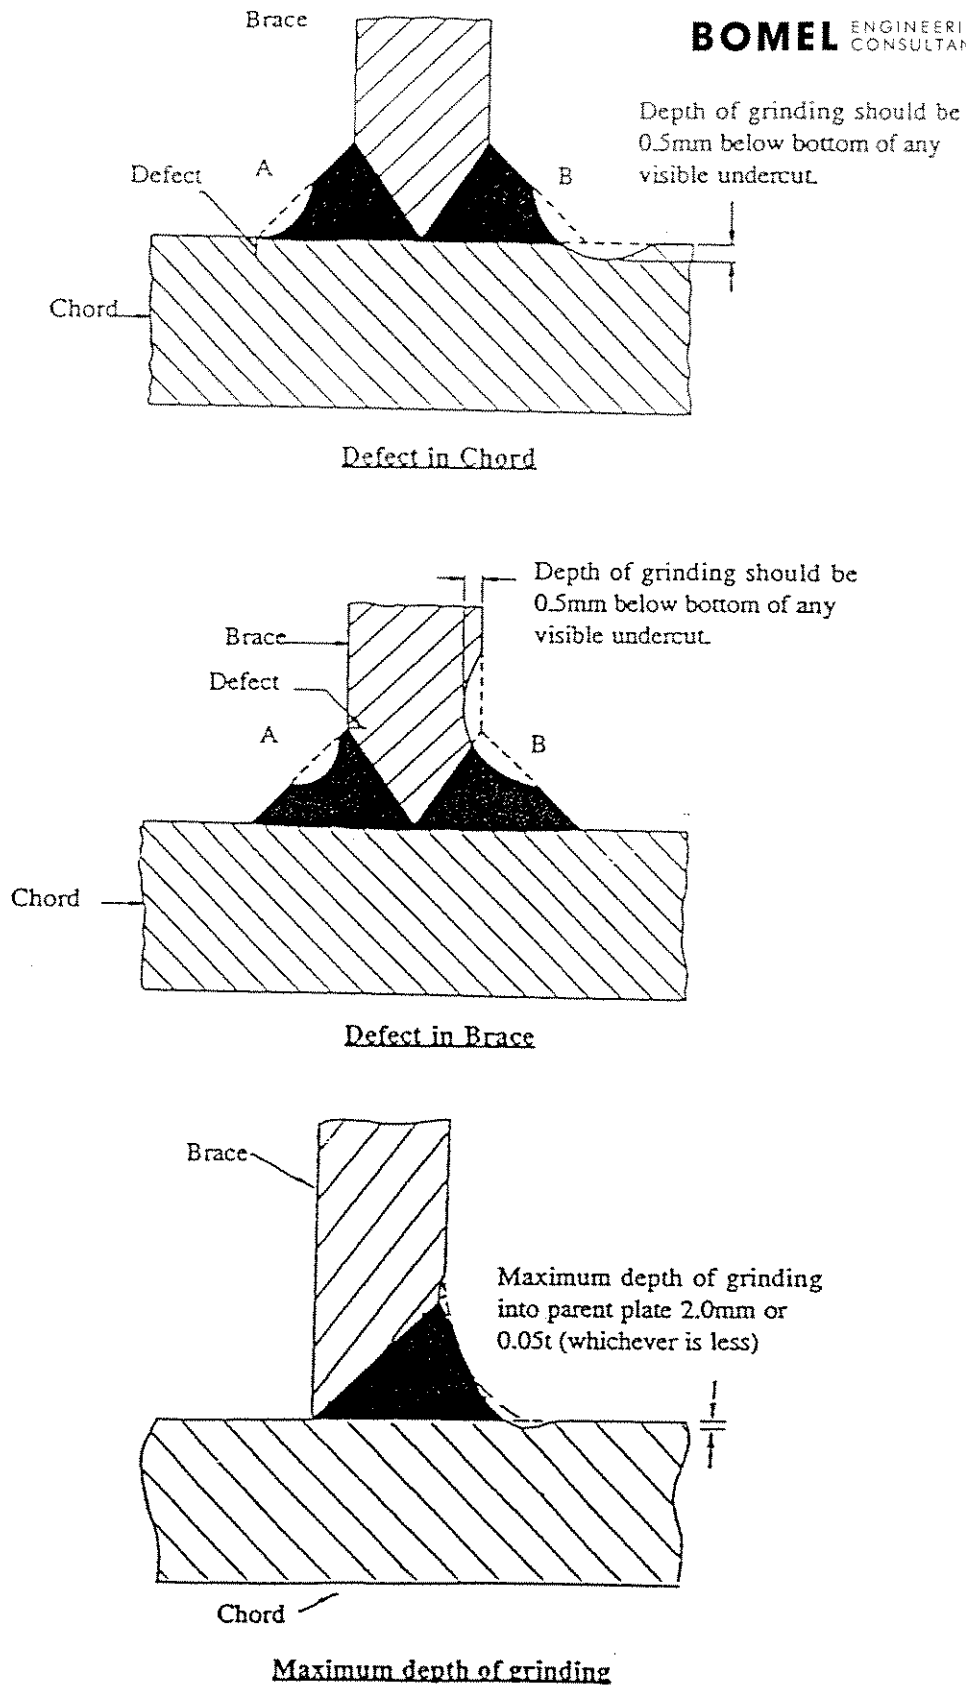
Weld toe grinding (HSE 1995)
